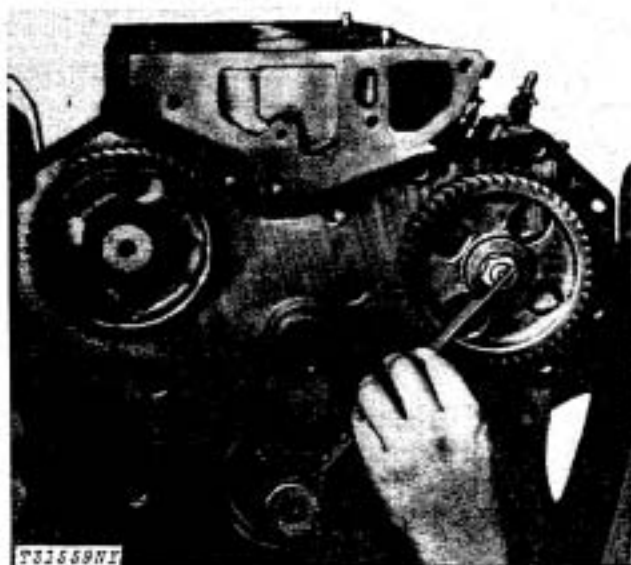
Timing the Injection Pump Gear with JD-254 Tool
